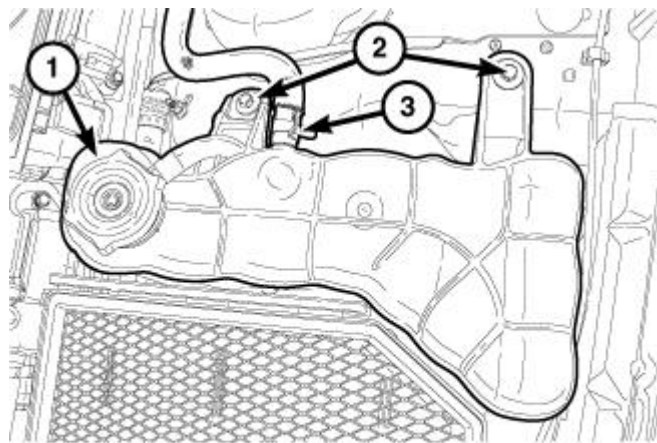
Coolant Recovery Container Pressure Cap, Tube & Screws
